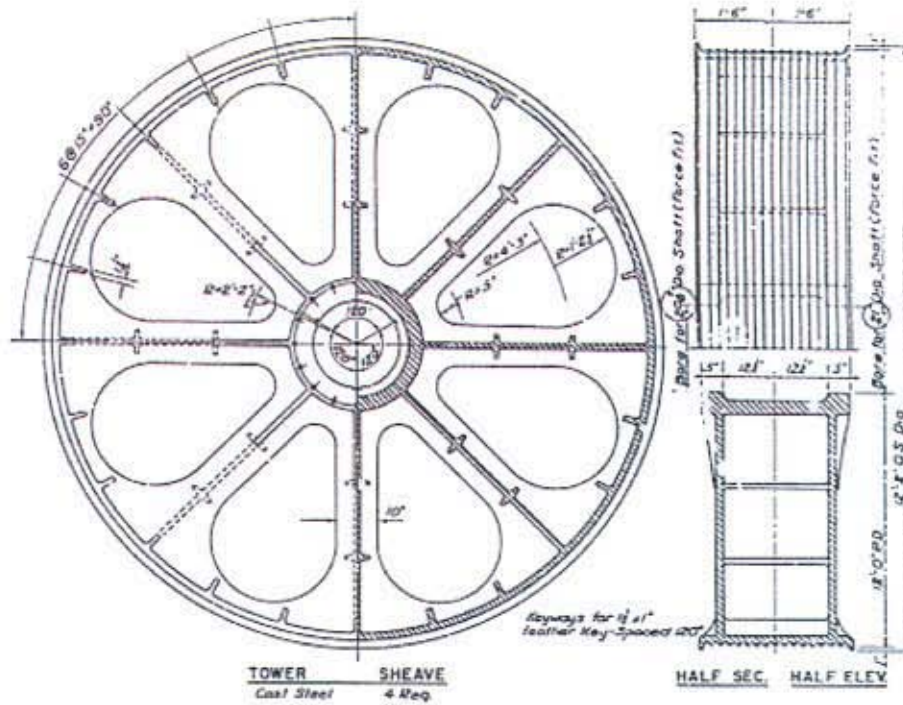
Sheave details from 1960 retrofit drawings
